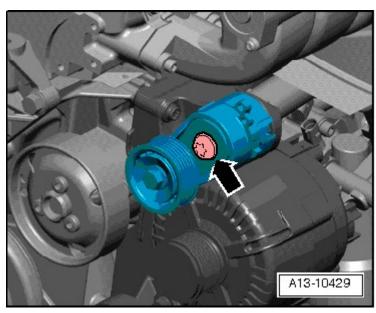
Ribbed Belt Tensioner Bolt Courtesy of AUDI OF AMERICA, LLC
